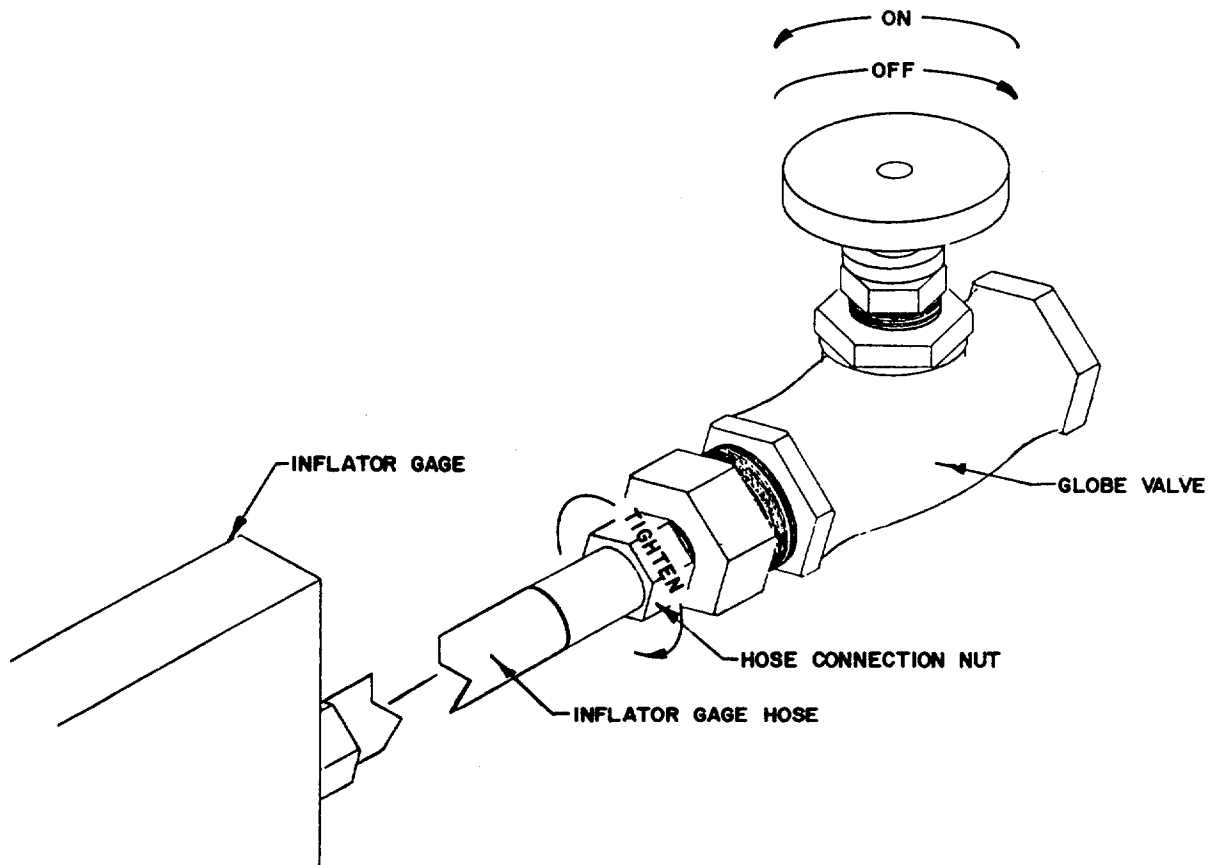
INFLATOR GAGE HOSE CONNECTION
